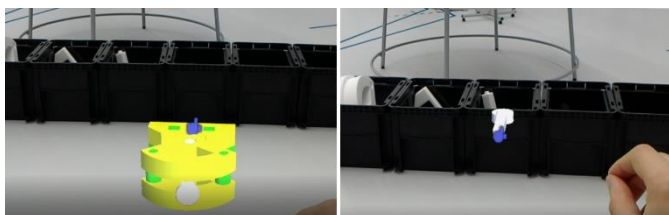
Placing the model and parts in ARAssembly-HoloLens.
